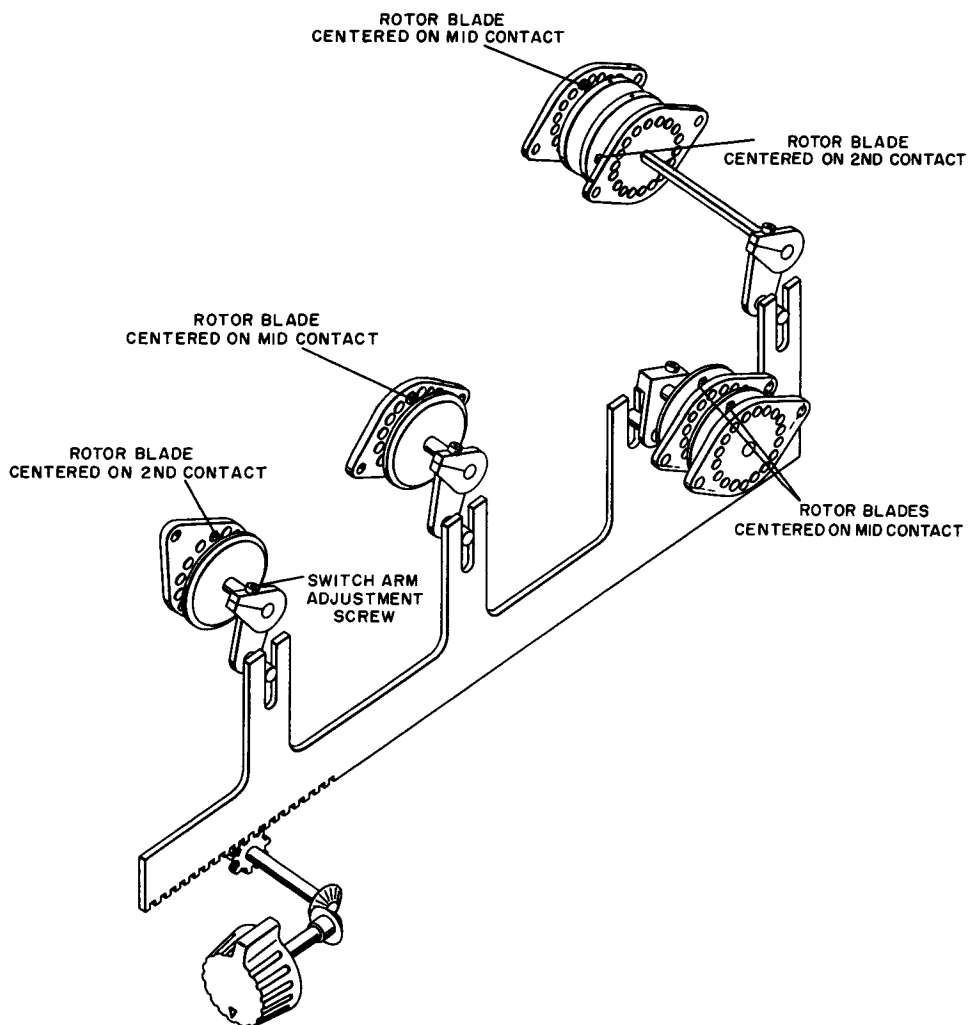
Rotary selector switches operated by gear and sliding bar.
